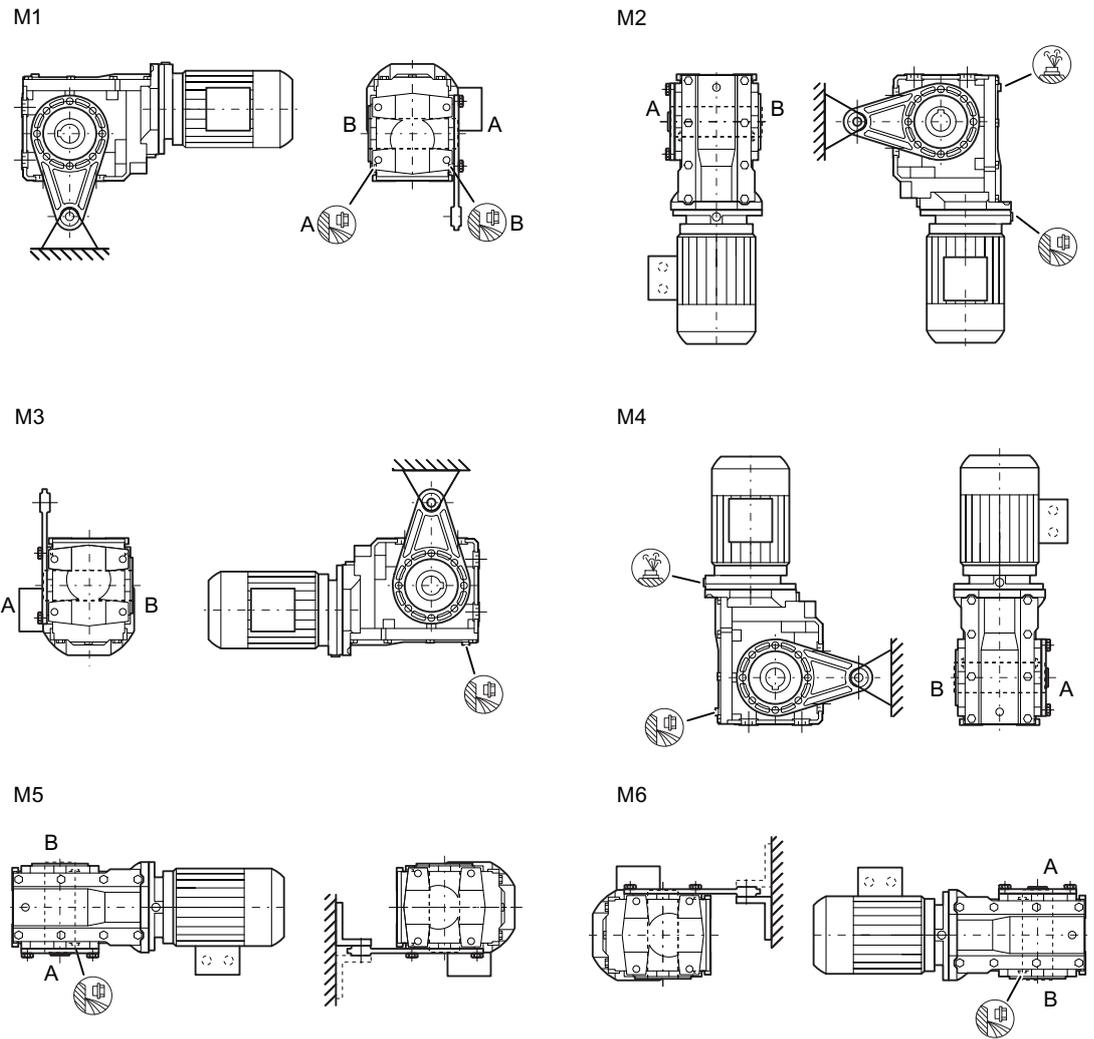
Mounting position for bevel gearbox BAD shaft-mounted design, size 29
